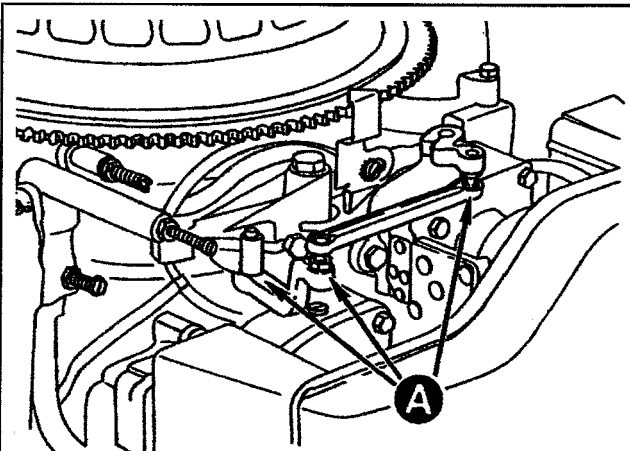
Carburetor lubrication points-carbureted 120-300 Hp (2000/3000/4000cc) V4/V6/V8 Motors
